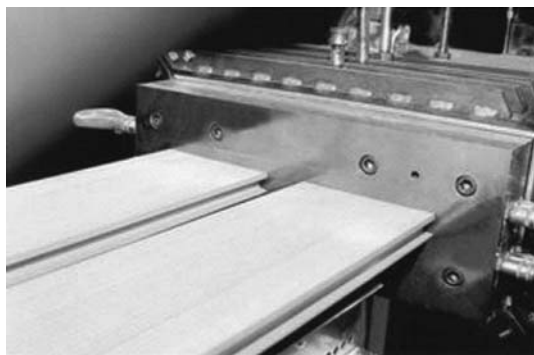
Direct extrusion-molding machine (Reifenhoiser).
